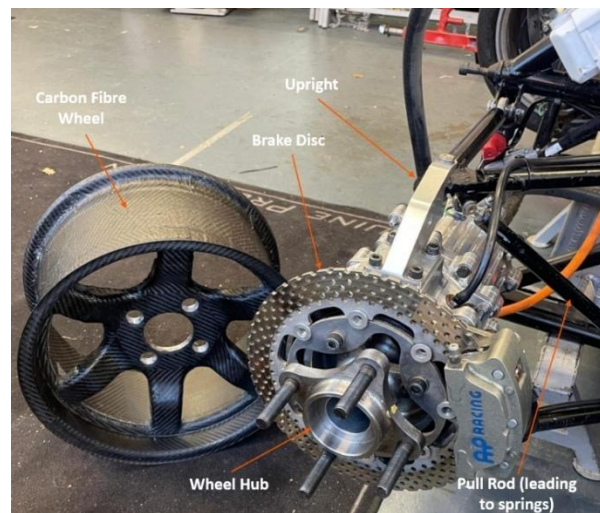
Rear corner with carbon fibre wheel removed showing rotational and unsprung mass
